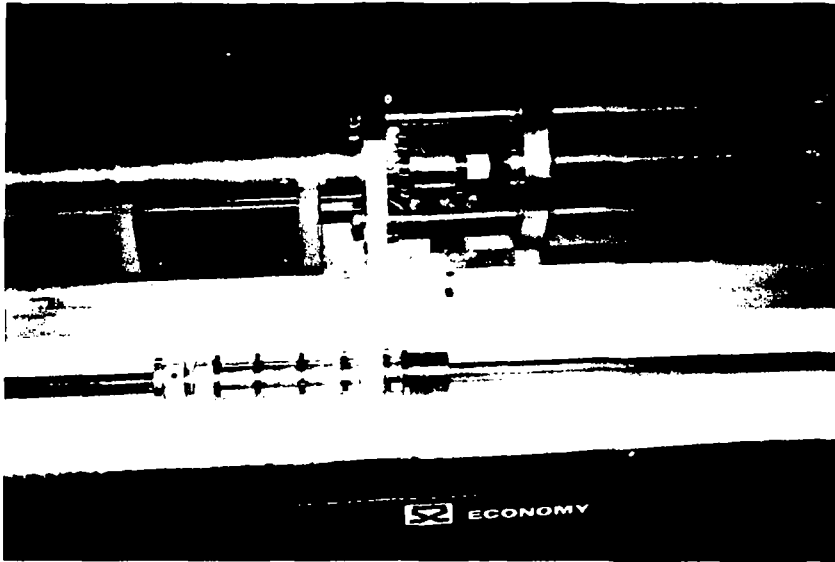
LEAD SCREW CONNECTED TO SHAFT ASSEMBLY
